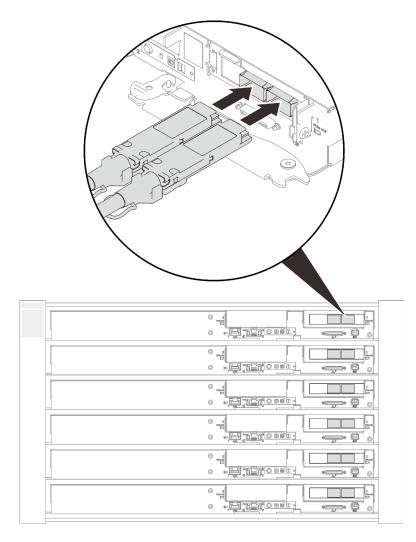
Connecting QSFP cables to SD650-N V2 tray
